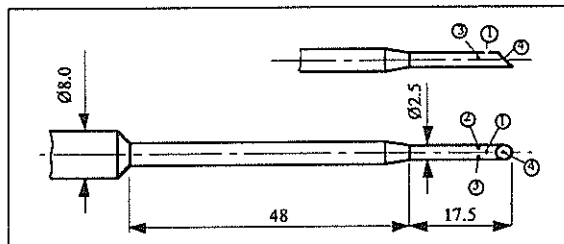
Cylindrical pressure probe (\varnothing 2.5 mm) with four miniature pressure sensors
